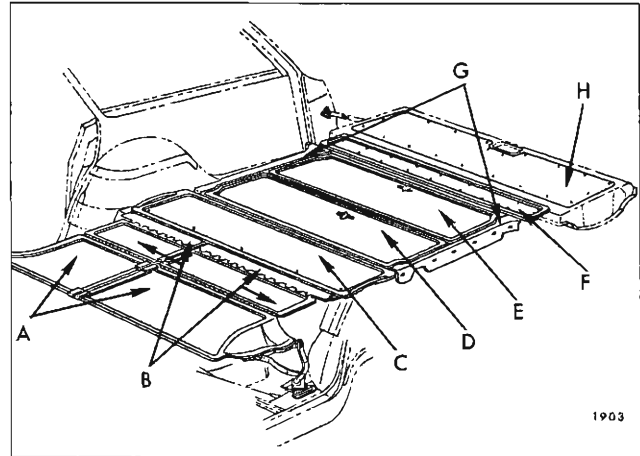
H29—Folding Seats and Floor Panels 25000 "45" Styles
